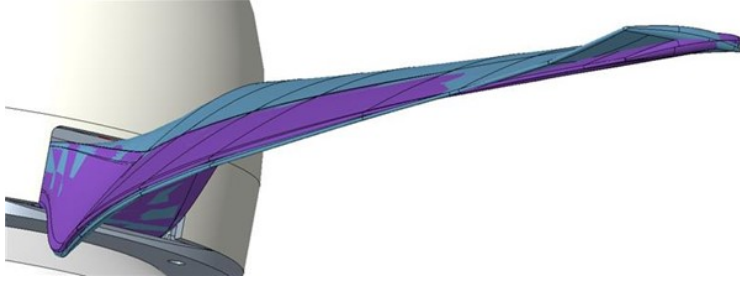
CAD Models of Final Prandtl and MIL Blades - Back
